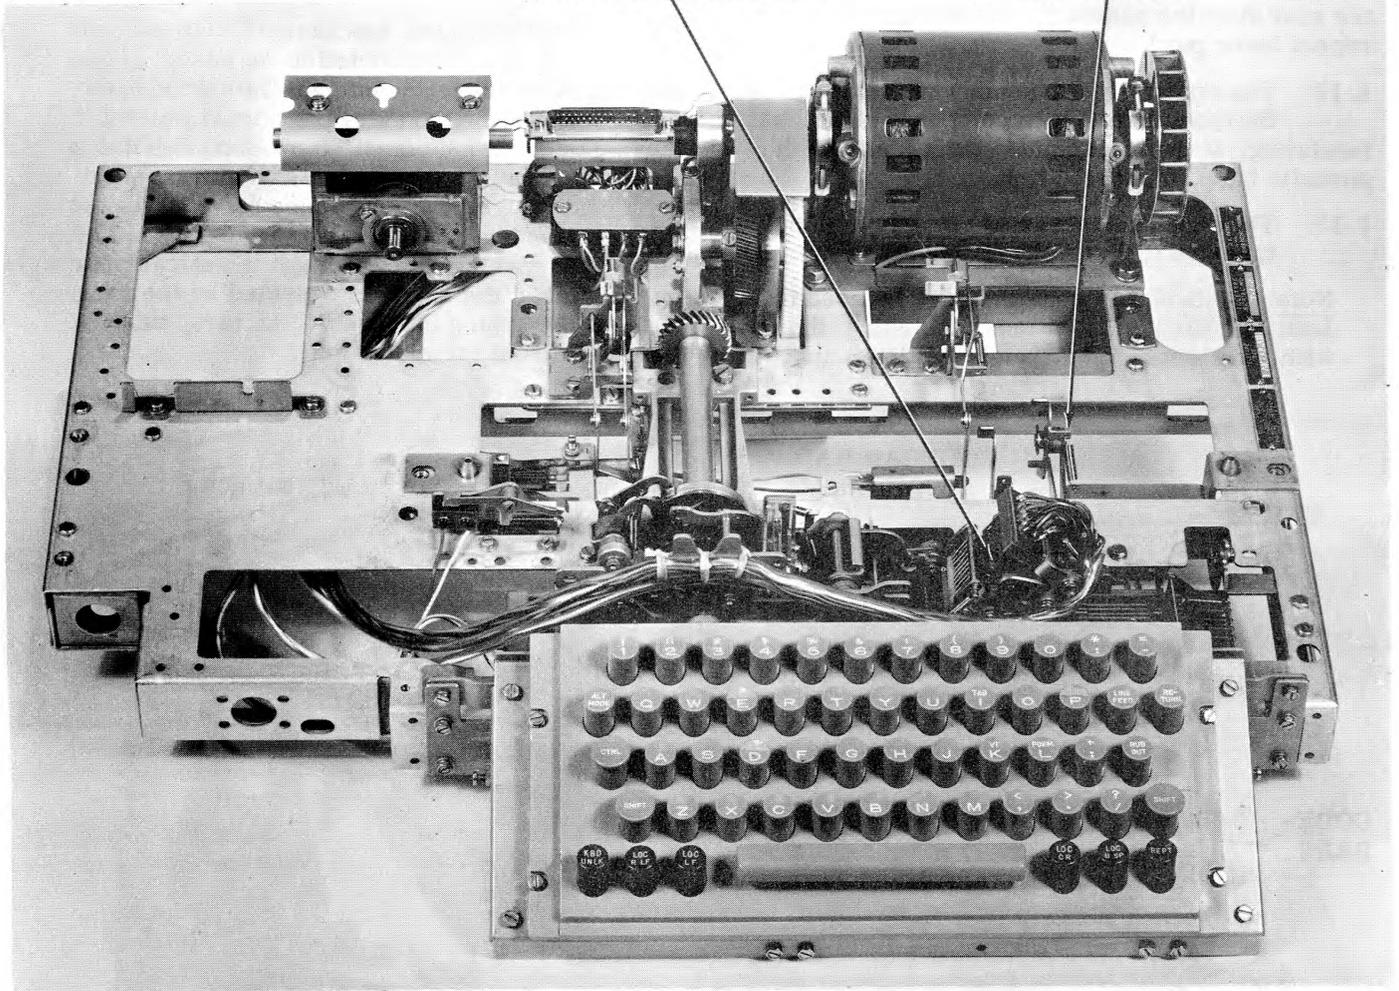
Typical Keyboard for Automatic Send-Receive Sets (Front View)
